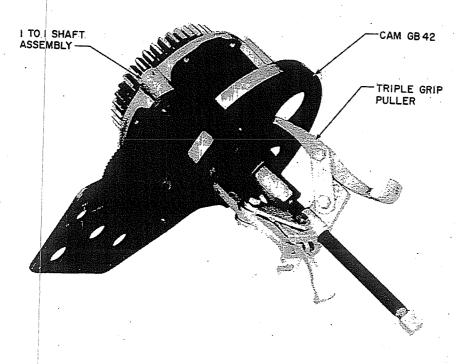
1 to 1 Shaft, Removal of Cam GB42
